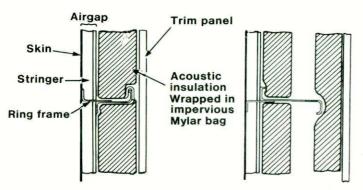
Typical sidewall installations: left, between-frame blanket system; right, between-frame/overframe system
